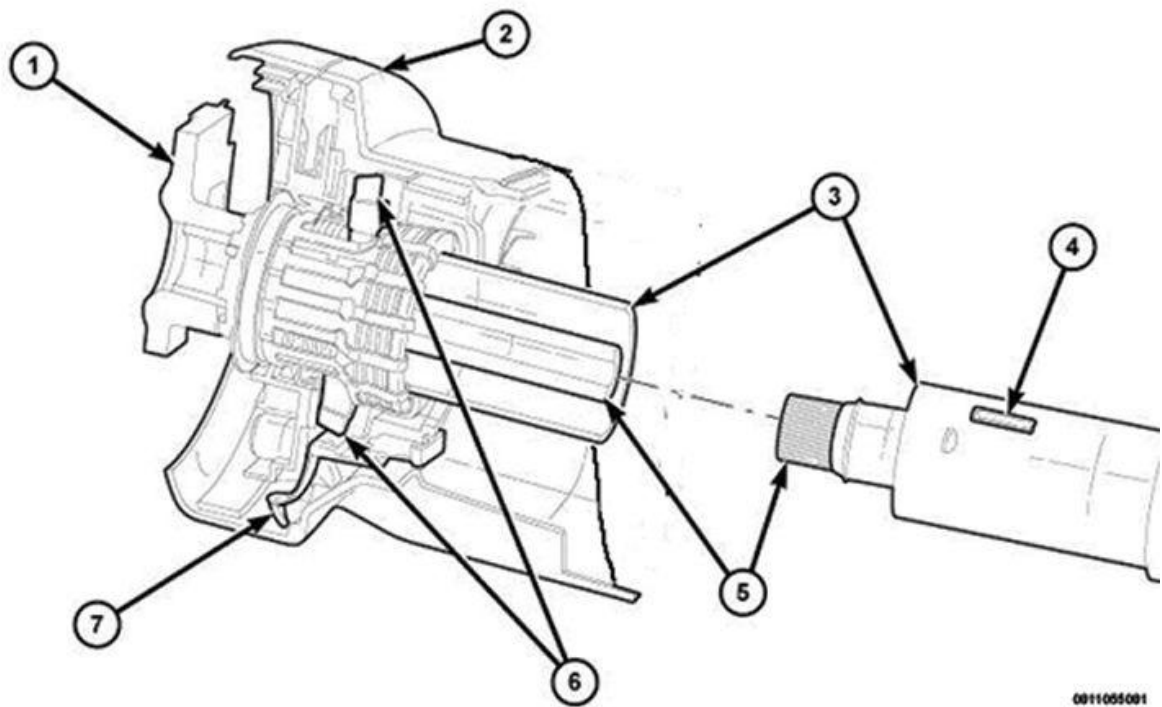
Steering Column Control Module Shroud, Keystones, Slots & Jacket
